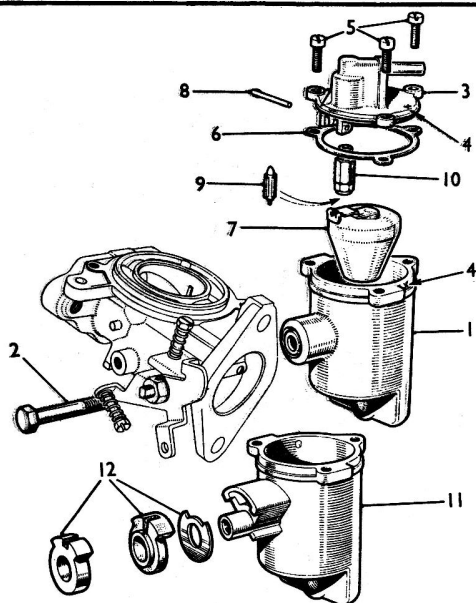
DISMANTLING THE HS6 CARBURETTOR - STAGE 5
